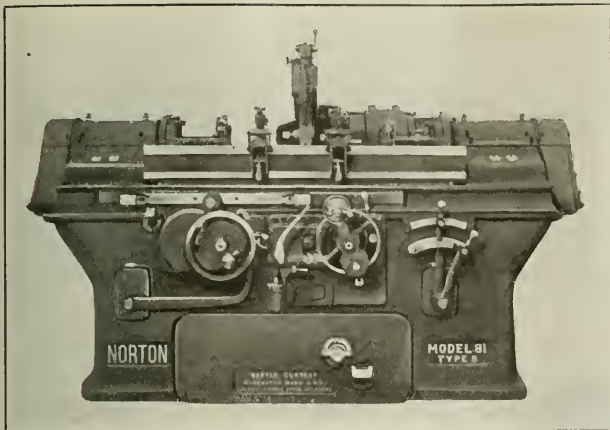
Norton Model 81 Type B Crankpin Grinding Machine
